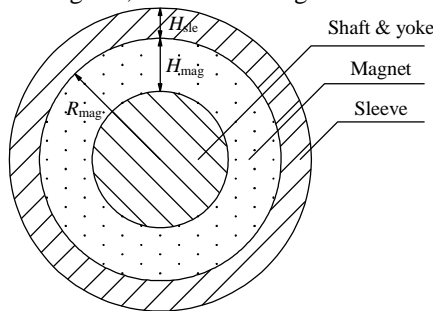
Structure and dimensions of surface-mounted PM rotor
